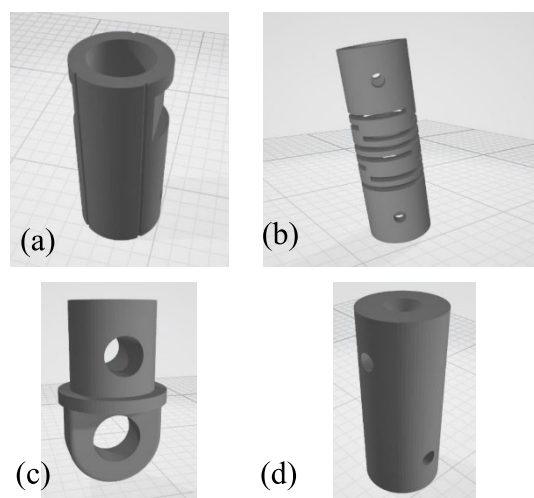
Prototype shaft structure, (a) the top part, (b) middle, (c) the bottom part (hook), and two pieces of (d) the top-middle and middle-bottom linking parts (intermediate tubes).
